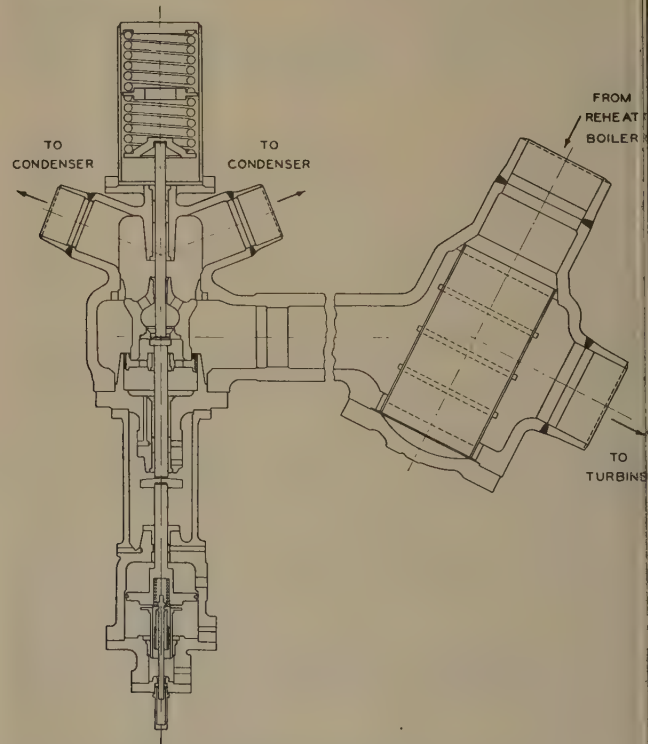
OIL-CONTROLLED UNLOADING VALVE
